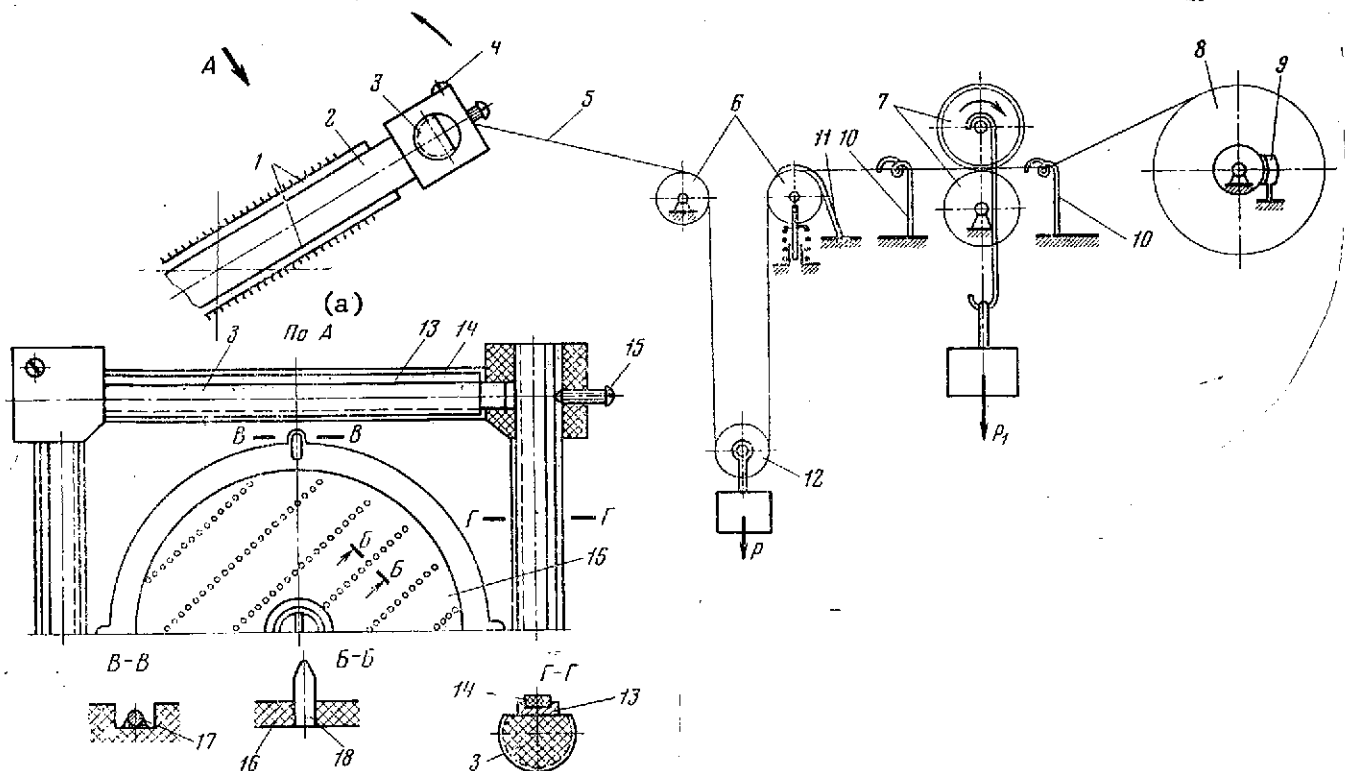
Attachment for winding a grid from wire less than 0.025 mm in diameter. 1 -- ring; 2 -- attachment; 3 -- screw for setting the winding pitch; 4 -- screw for attaching the wire; 5 -- wire; 6 -- guide rolls; 7 -- feed rolls; 8 -- coil with wire; 9 -- coil brake; 10 -- guides; 11 -- damper; 12 -- weighted roll; 13 -- tire; 14 -- packing; 15 -- contact screw; 16 -- insert; 17 -- wire; 18 -- pins.
